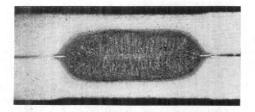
Spot weld in heat resisting steel (Nimonic 75).
